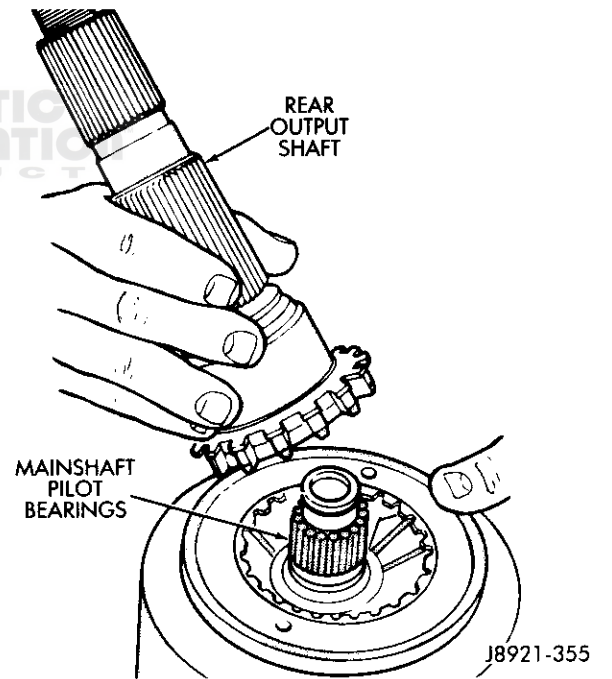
Installing Rear Output Shaft And Mainshaft Pilot Bearings
